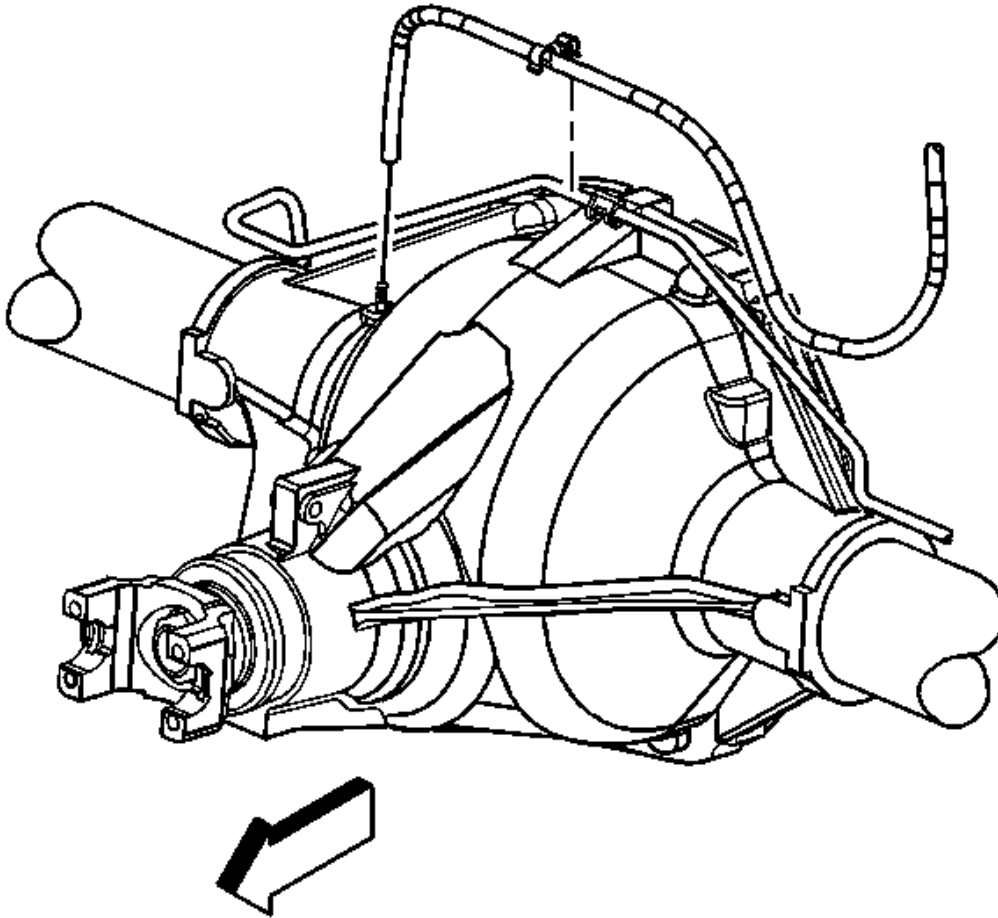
Rear Axle Vent Hose (8.6 or 9.5 Inch Ring Gear)
